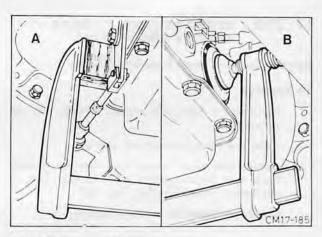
Removal of front servo using a screw clamp A – Protect housing with wooden block B – Remove servo piston spring
